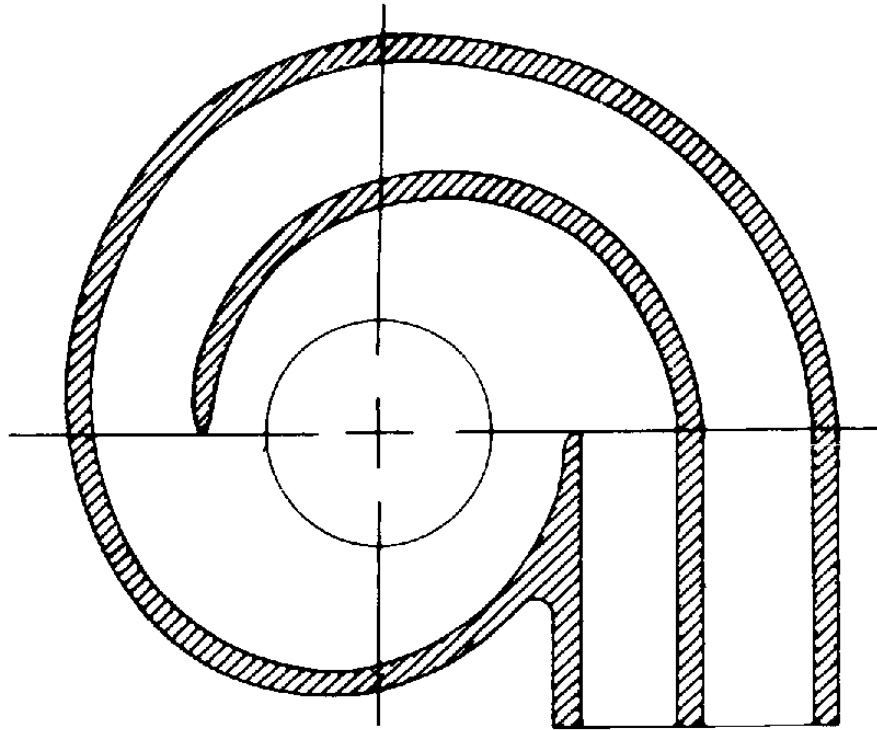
TYPICAL DOUBLE VOLUTE CASING
